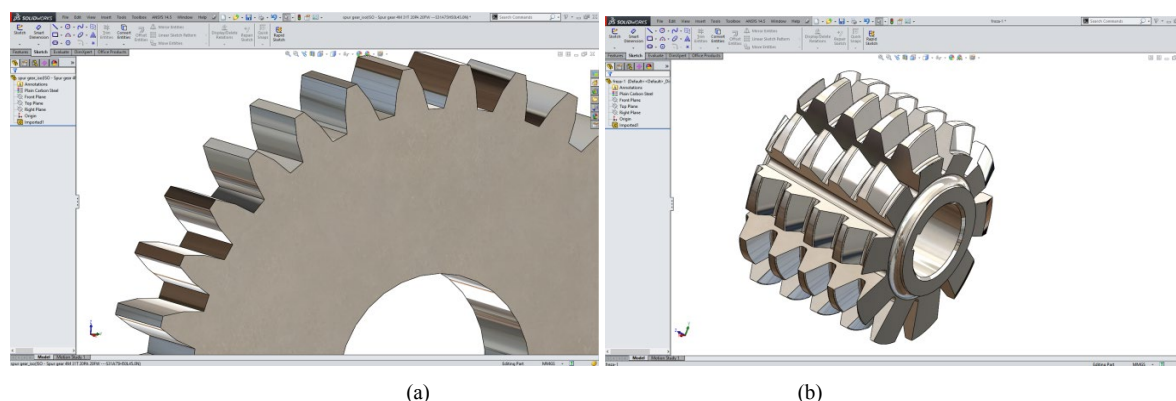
(a) Geometric models of the processed spur gear, and (b) hob gear cutter
